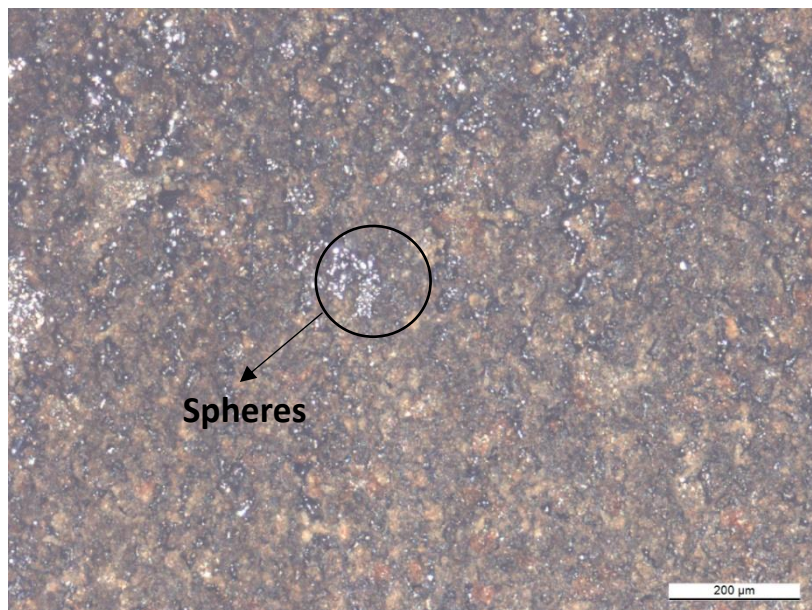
Optical microscope image of surface machined by C822 machining condition.
